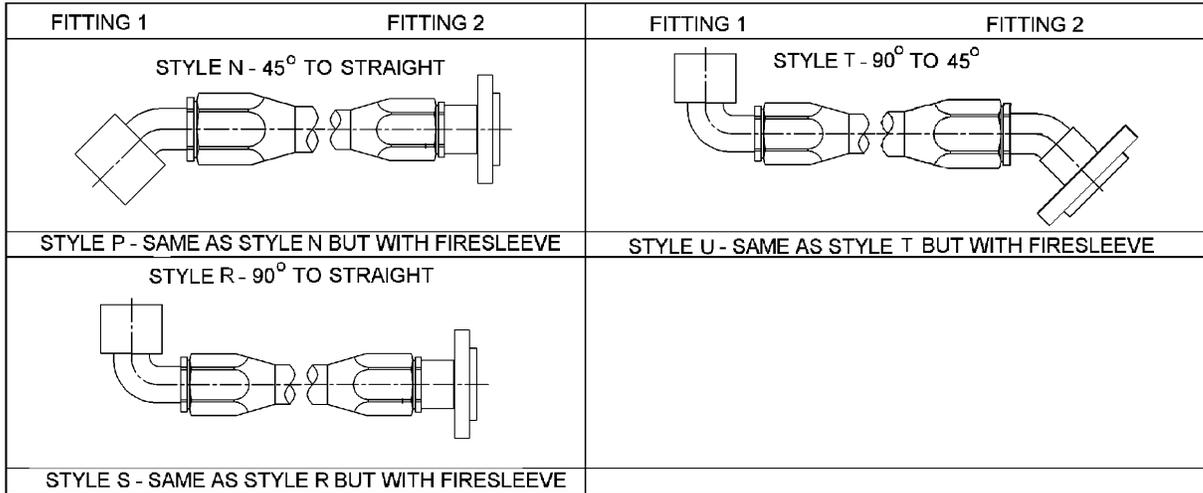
Hose assembly styles, field attachable fittings, flareless-to-flange – Continued.
